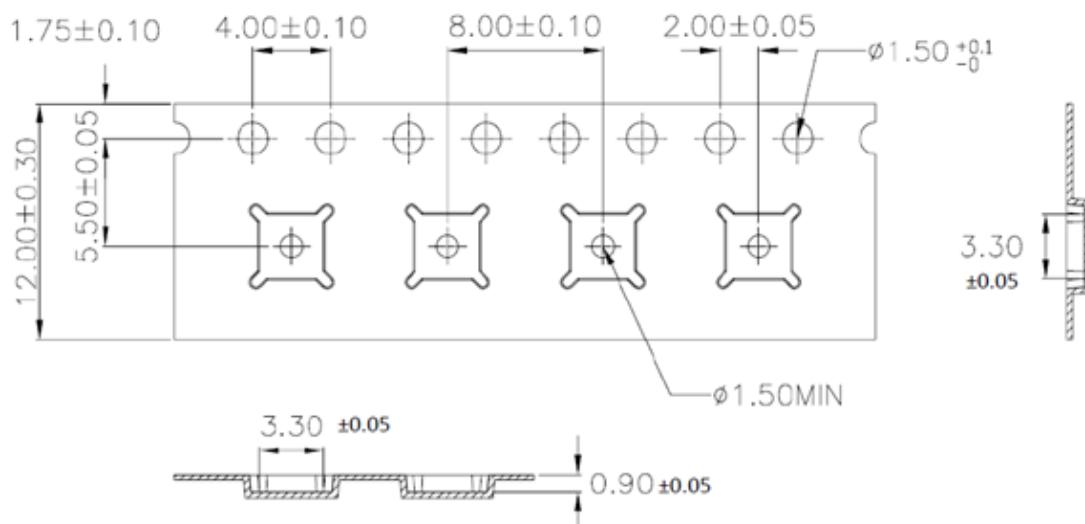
3 x 3 mm² Tape Dimensions (TYPE II) (for package height 0.75 mm)
